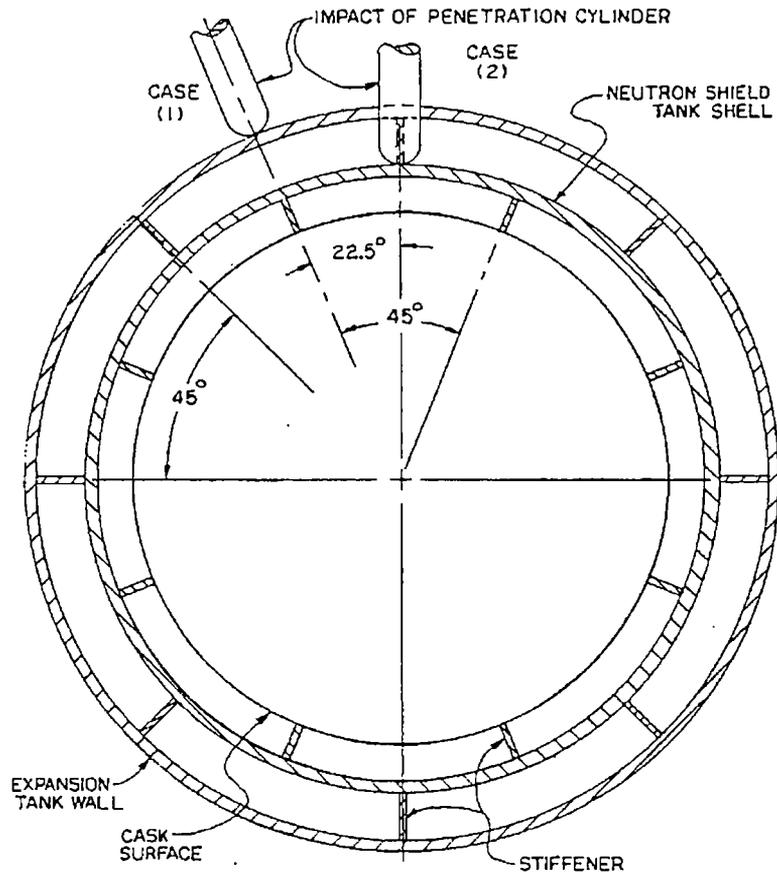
Impact of Penetration Cylinder on Neutron Shield Tank and Expansion Tank – Details for Analysis
